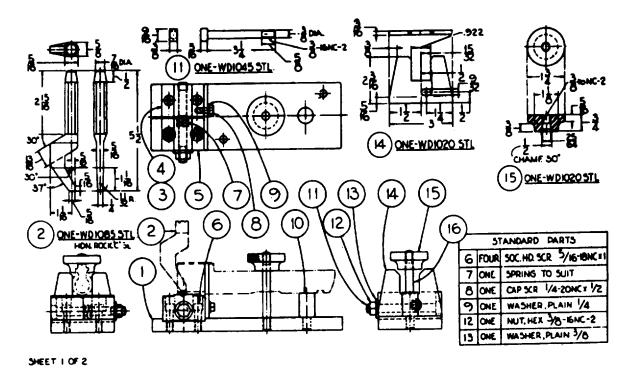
Improvised fixture for riveting front sight, (1 of 2)
